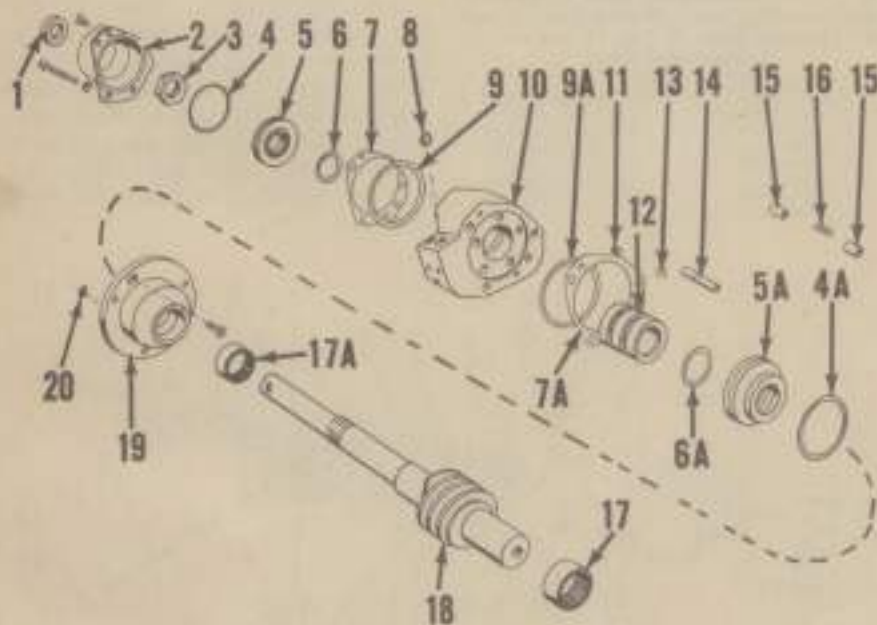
Exploded view of power steering control valve unit. Later production unit is shown; early production valves may be overhauled as described in text using lower parts shown above.
